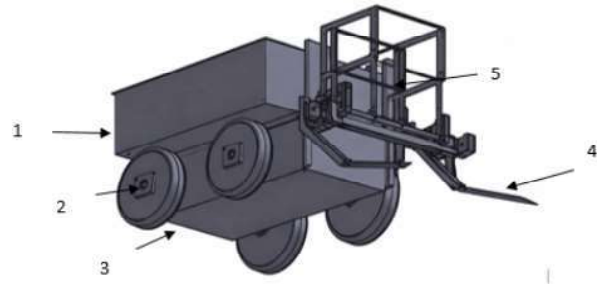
CAD model of the designed prime mover: 1) electronic system mounting frame; 2) flanges; 3) wheel mounting frame 4) weeding blades; 5) actuator mounting unit
